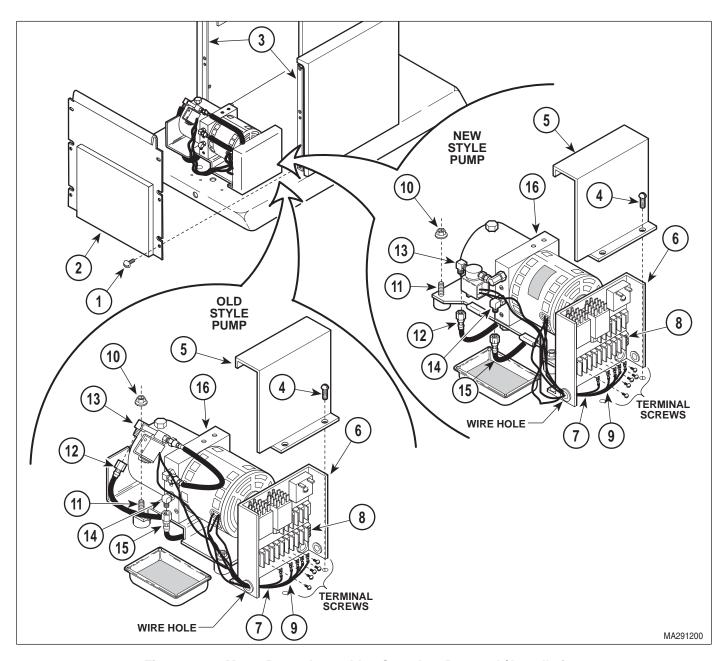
Motor Pump Assembly - Complete Removal / Installation
